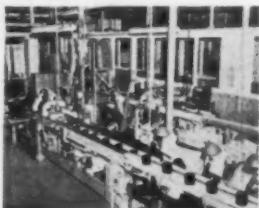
Tube making machine is in left background. A conveyor carries finished ethyl cellulose record belts past inspection stations in right foreground.
